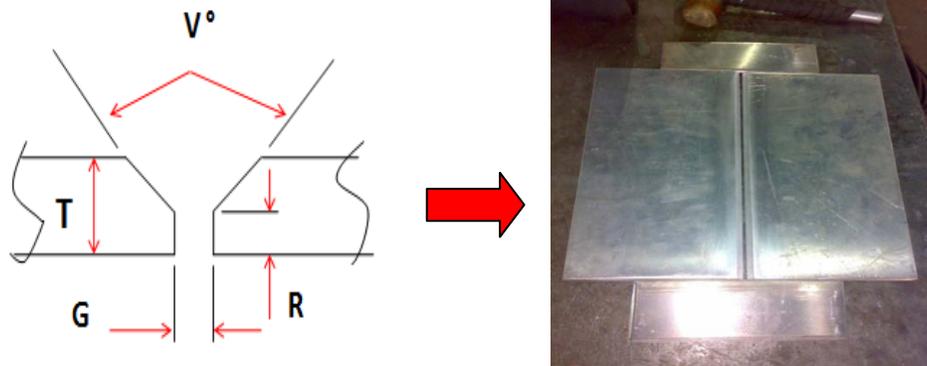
Plate Edge and Welding Joint Preparation
